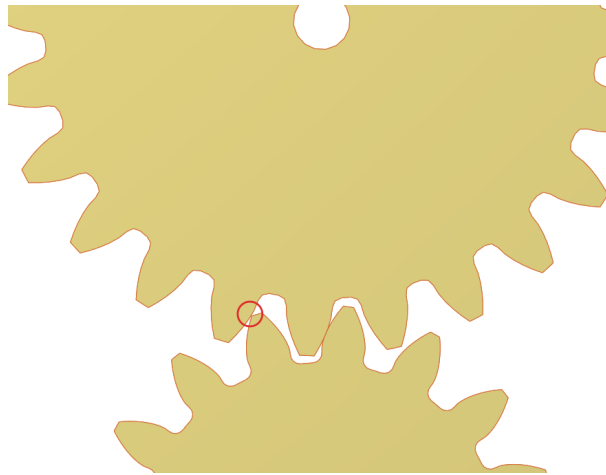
The tooth bending leads to inappropriate contact configuration such as too early tip contacts between gear teeth ($t = 0.0046$ s).
